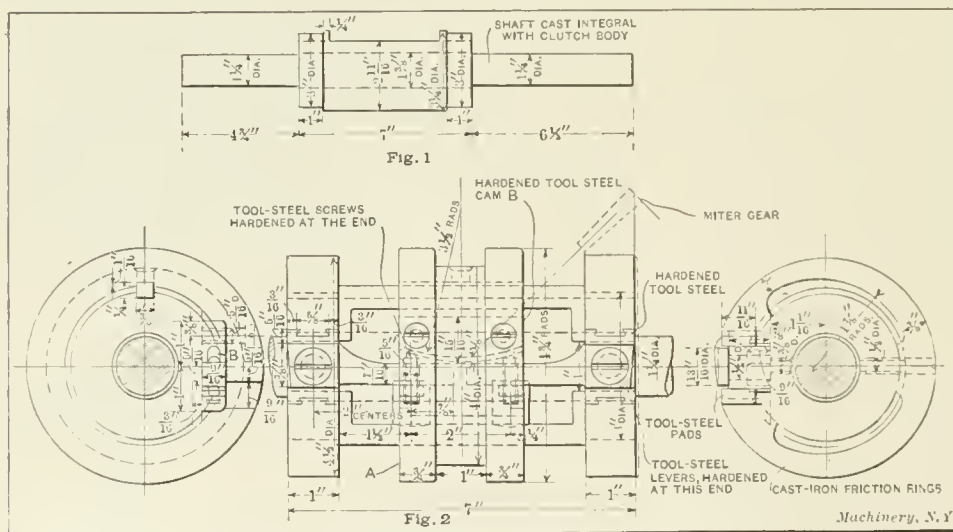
Detail of Shaft and Clutch Body. Fig. 2. Assembled View showing how Clutch is operated
